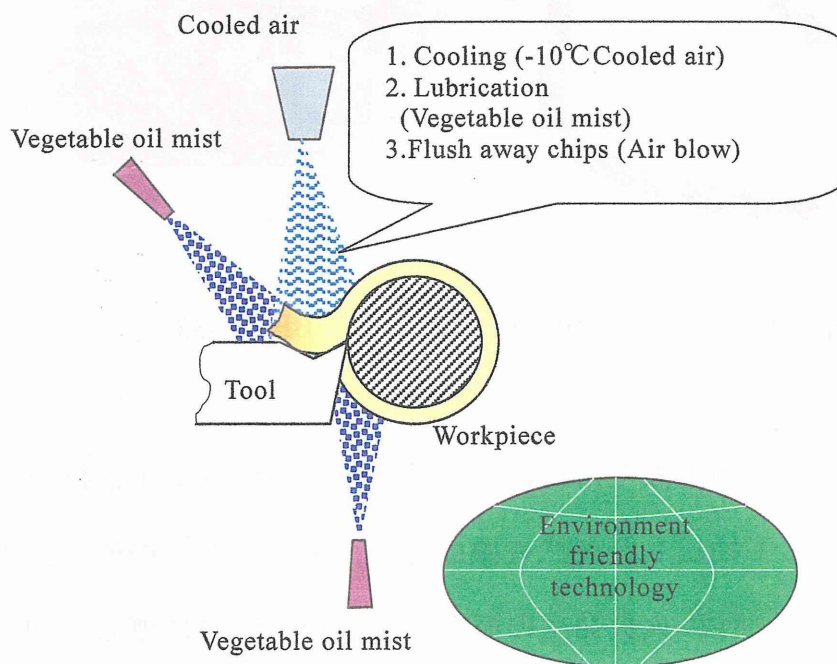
Cutting method of using small amount of lubricating oil and cold air cooling
